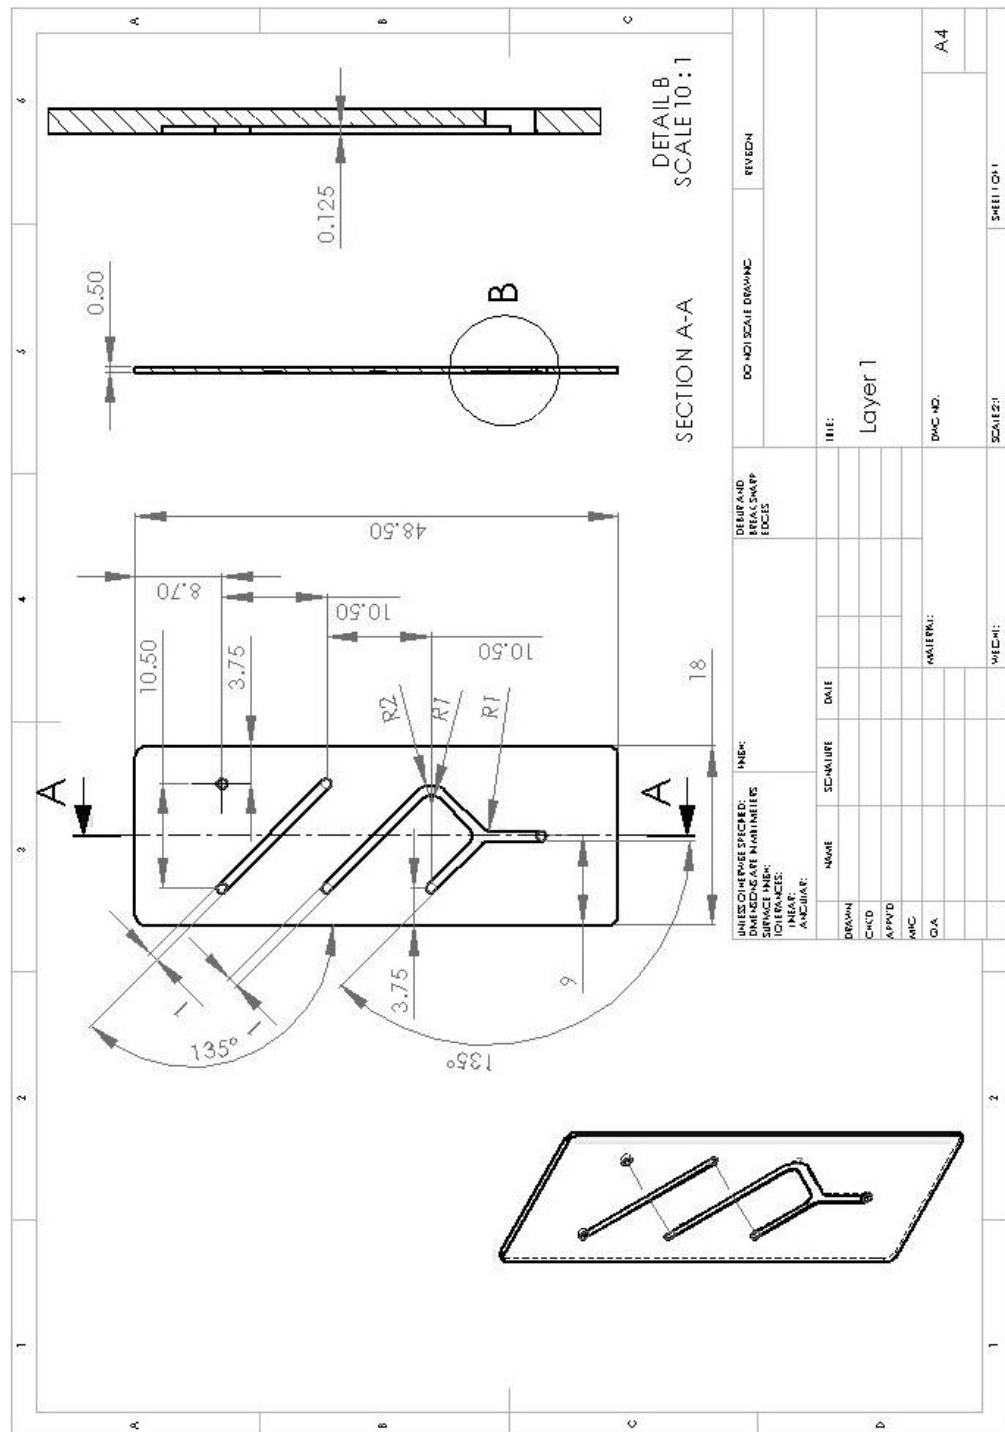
Layer 1 of the 3-D microfluidic demonstrator - Dimensions in mm.
